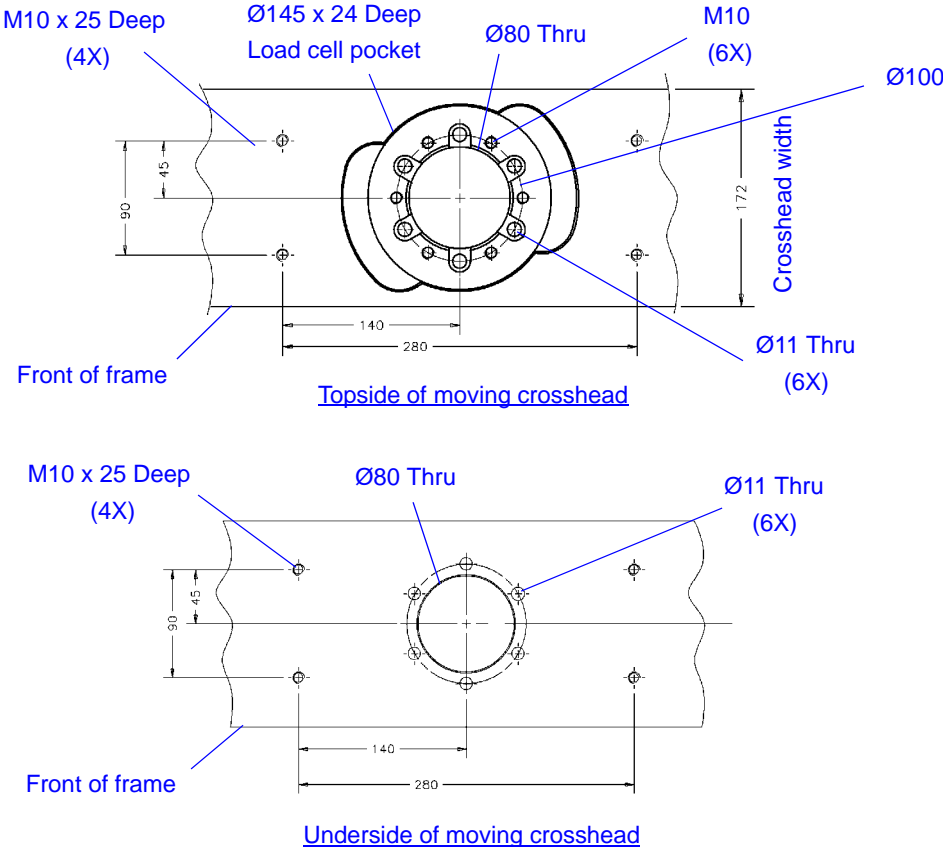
Series 5581 and 5582 Moving Crosshead Mounting Dimensions
